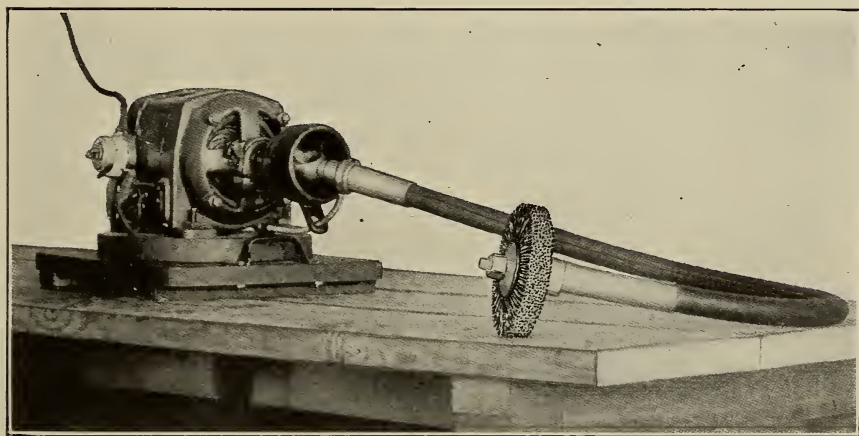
MOTOR DRIVEN MOLD CLEANER.
